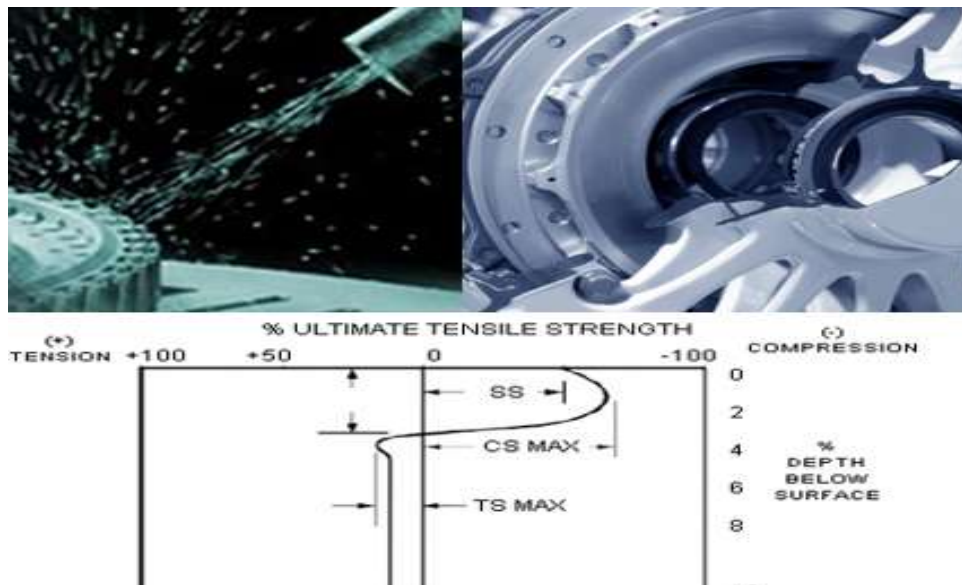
Shows shot peening on turret bearing casing assembly (offshore Tech, 2001)
